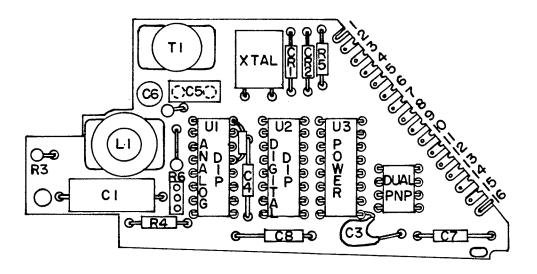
Component layout of the ultrasonic ranging unit circuit board (courtesy of the Polaroid Corp.).
